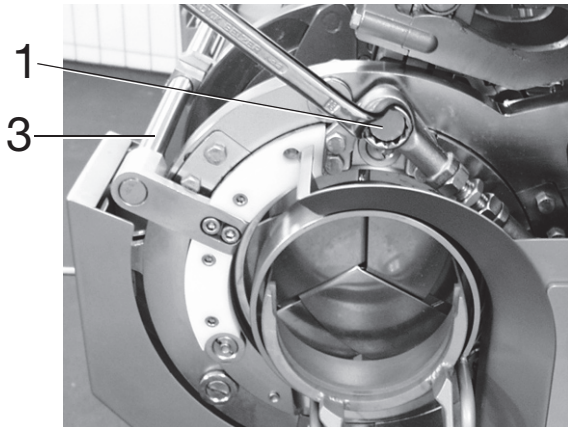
1 Removing the fixing screw on the separator drive
